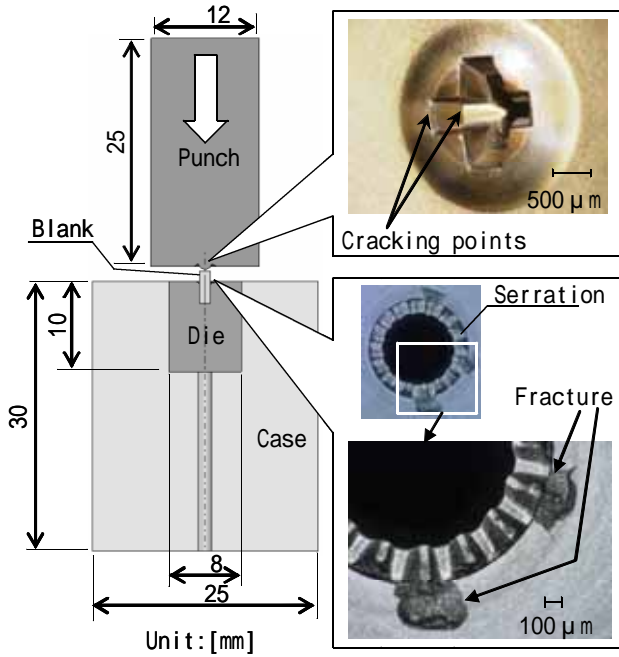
Schematic illustration of die configuration and photograph of heading punch and die
